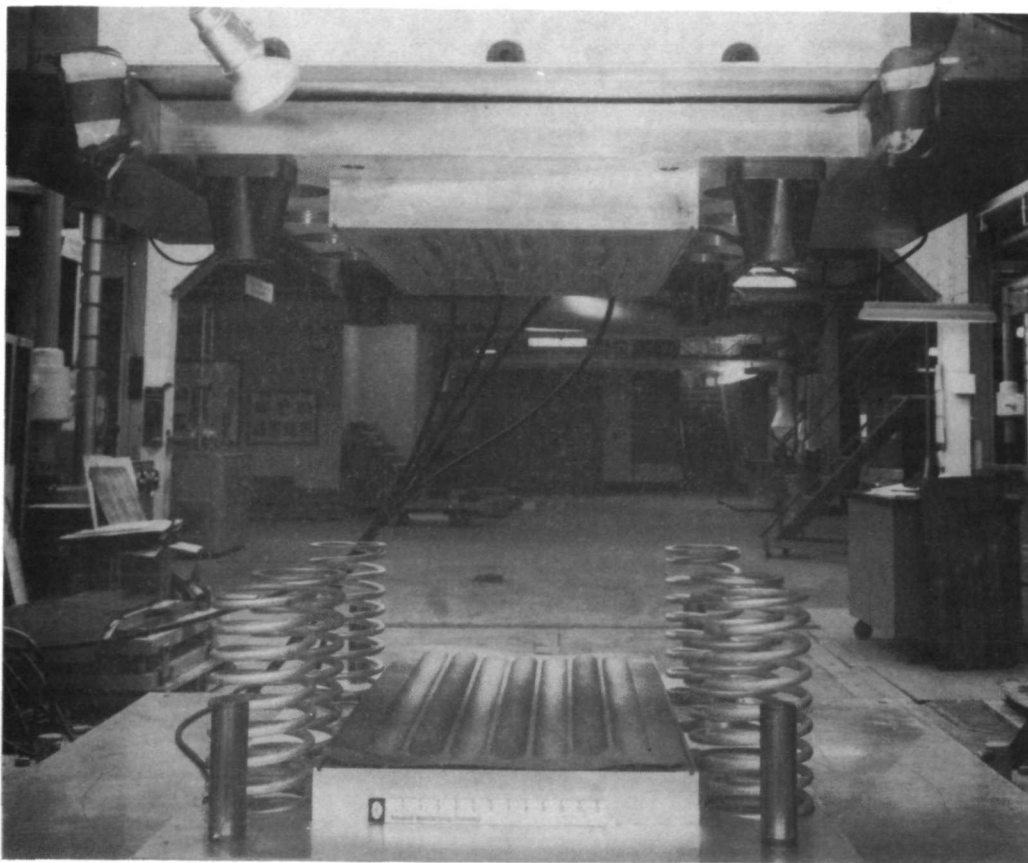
Beaded Panel Forming Die in 22-MN (5×10^6 -lb) Press
